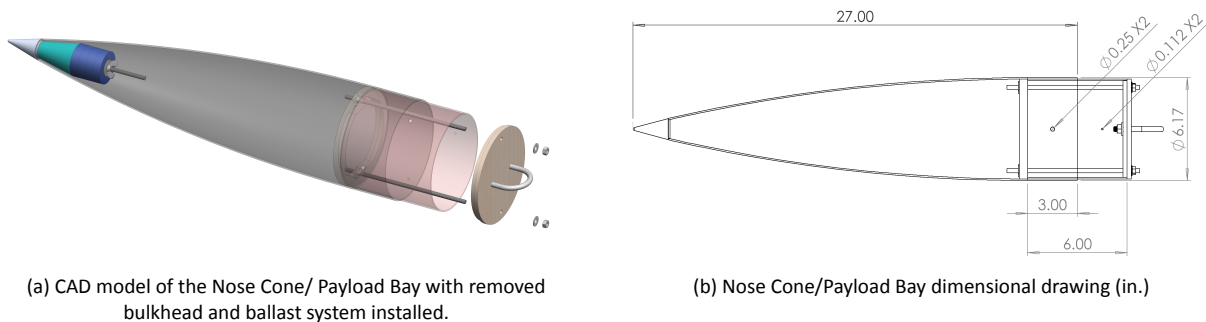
CAD model and dimensional drawing of the Nose Cone/ Payload Bay.
